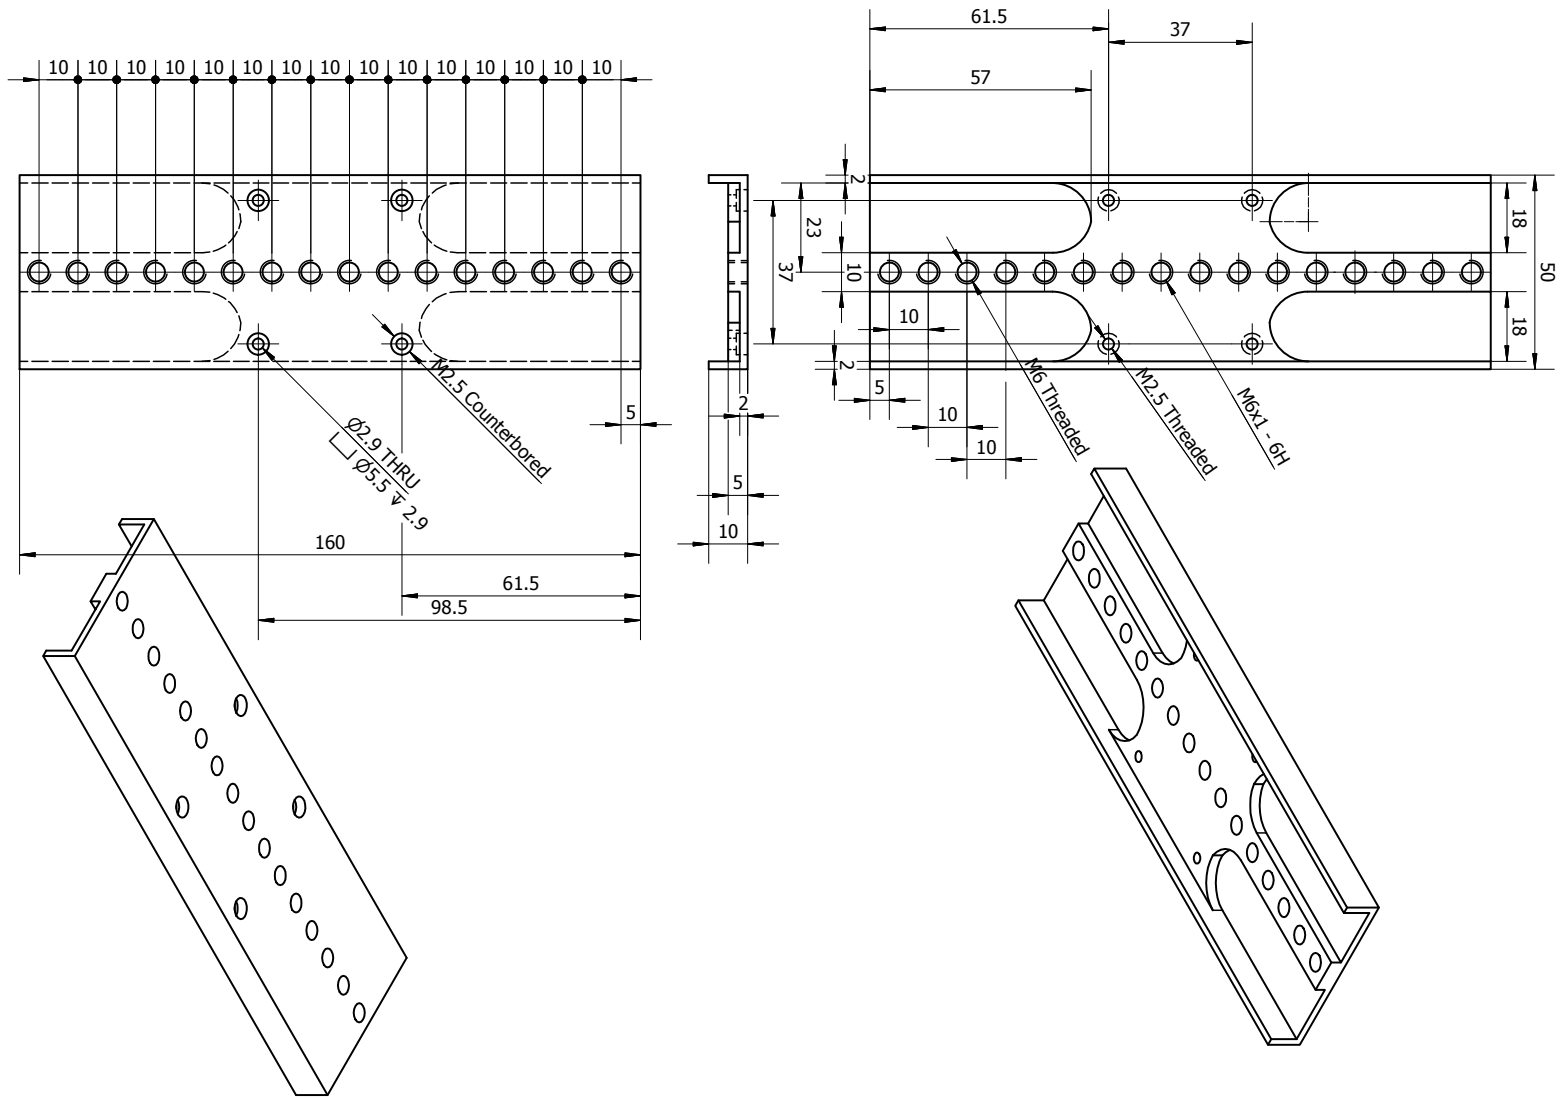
Technical drawing of the mount for the TIRF lens. Material: aluminium.
